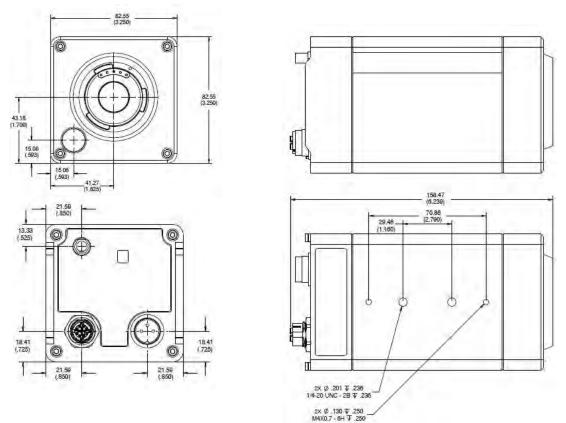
Front, Rear and Side View Dimensions of Standard ThermoView® Imager
